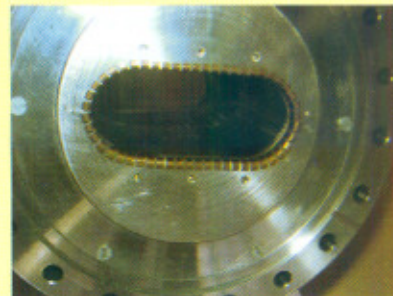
RF-shielded bellow assembly for Indus-2
